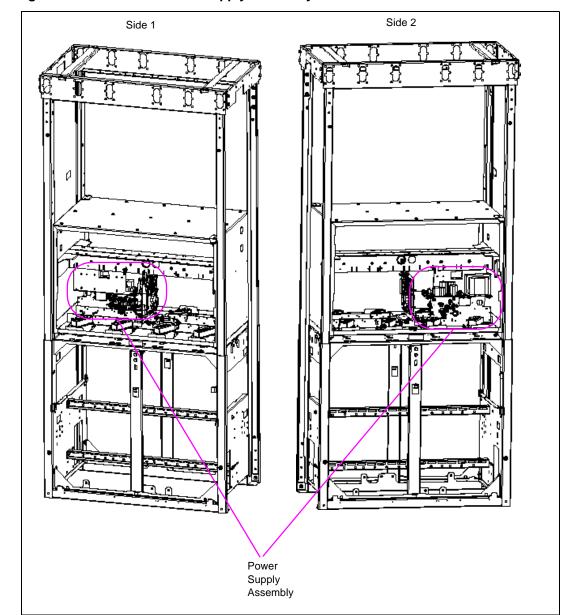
Location of Power Supply Assembly M02274A001 in Encore Unit
